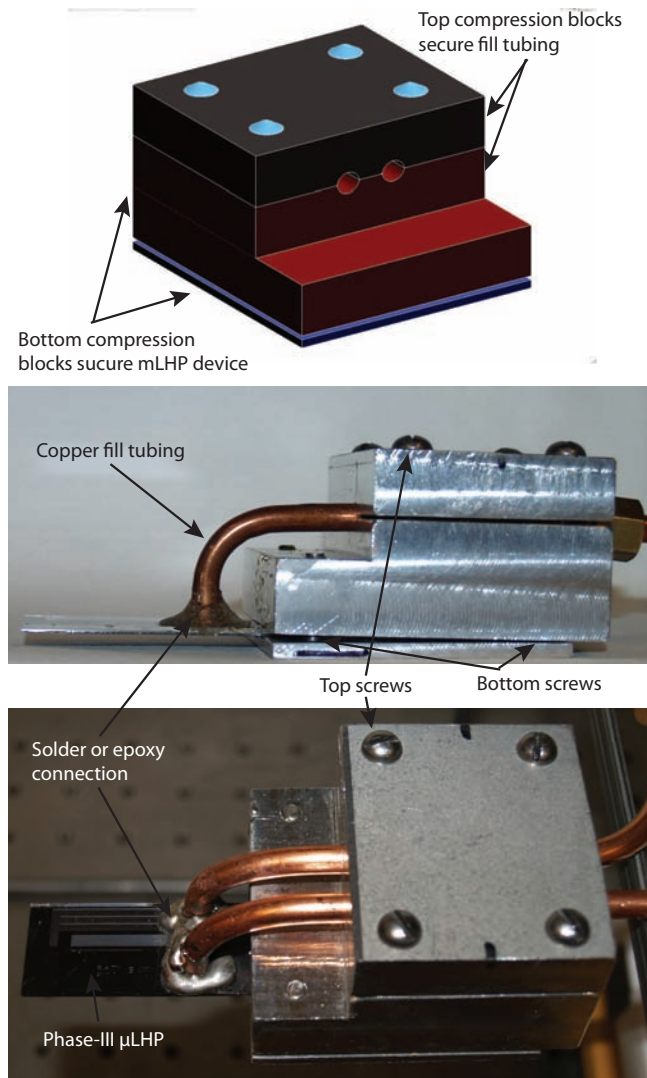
Aluminum double compression fitting assembly (DCFA) packaging (Method II): Copper tubing is mechanically placed on top of the μ LHP fill holes using a machined aluminum setup. The tubing can be either epoxied or soldered onto the device. In the latter case, a thin metal film has to be deposited on the wafer.
